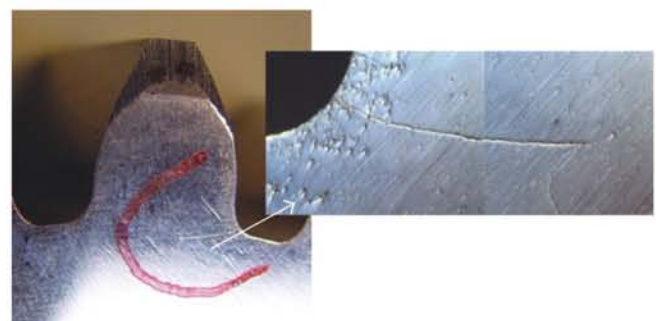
Pinion with a fatigue crack in the tooth root [21].
